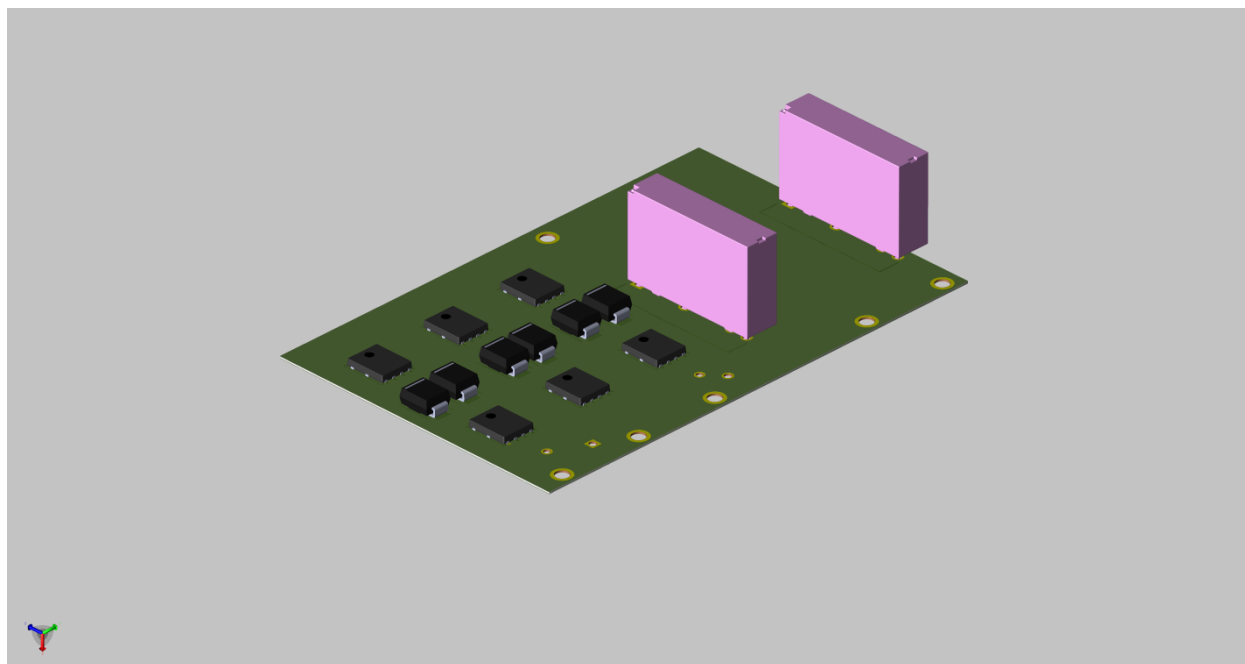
Isometric bottom 3D view for PCB assembled board.
